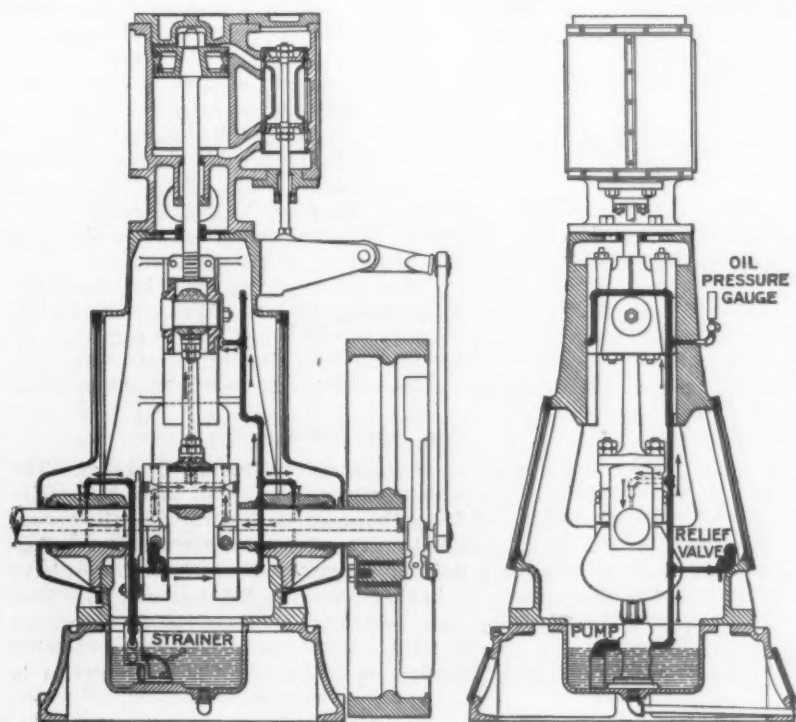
Vertical Sections Showing the Lubricating System of the Sturtevant VS5 Engine.
